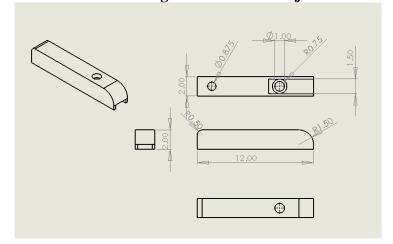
Manufacturing Worksheet for Adjustable Armrests
